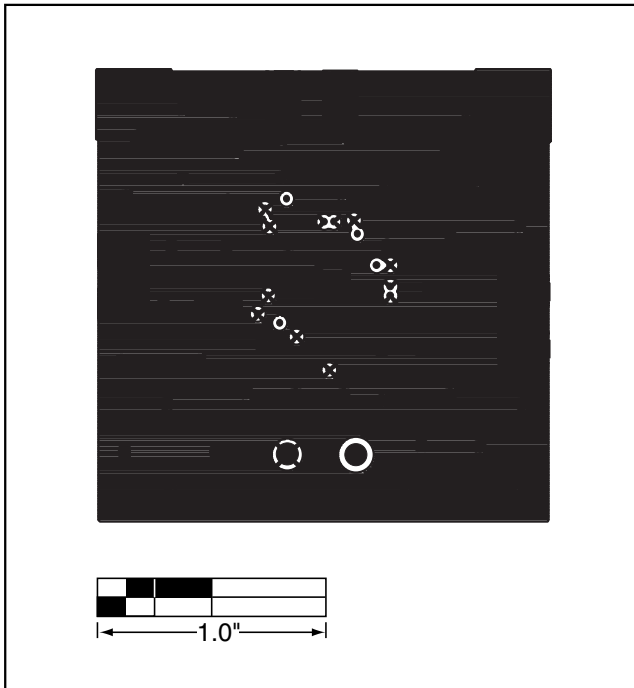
MAX9989/MAX9990 EV Kit PC Board Layout—Bottom Layer Metal
